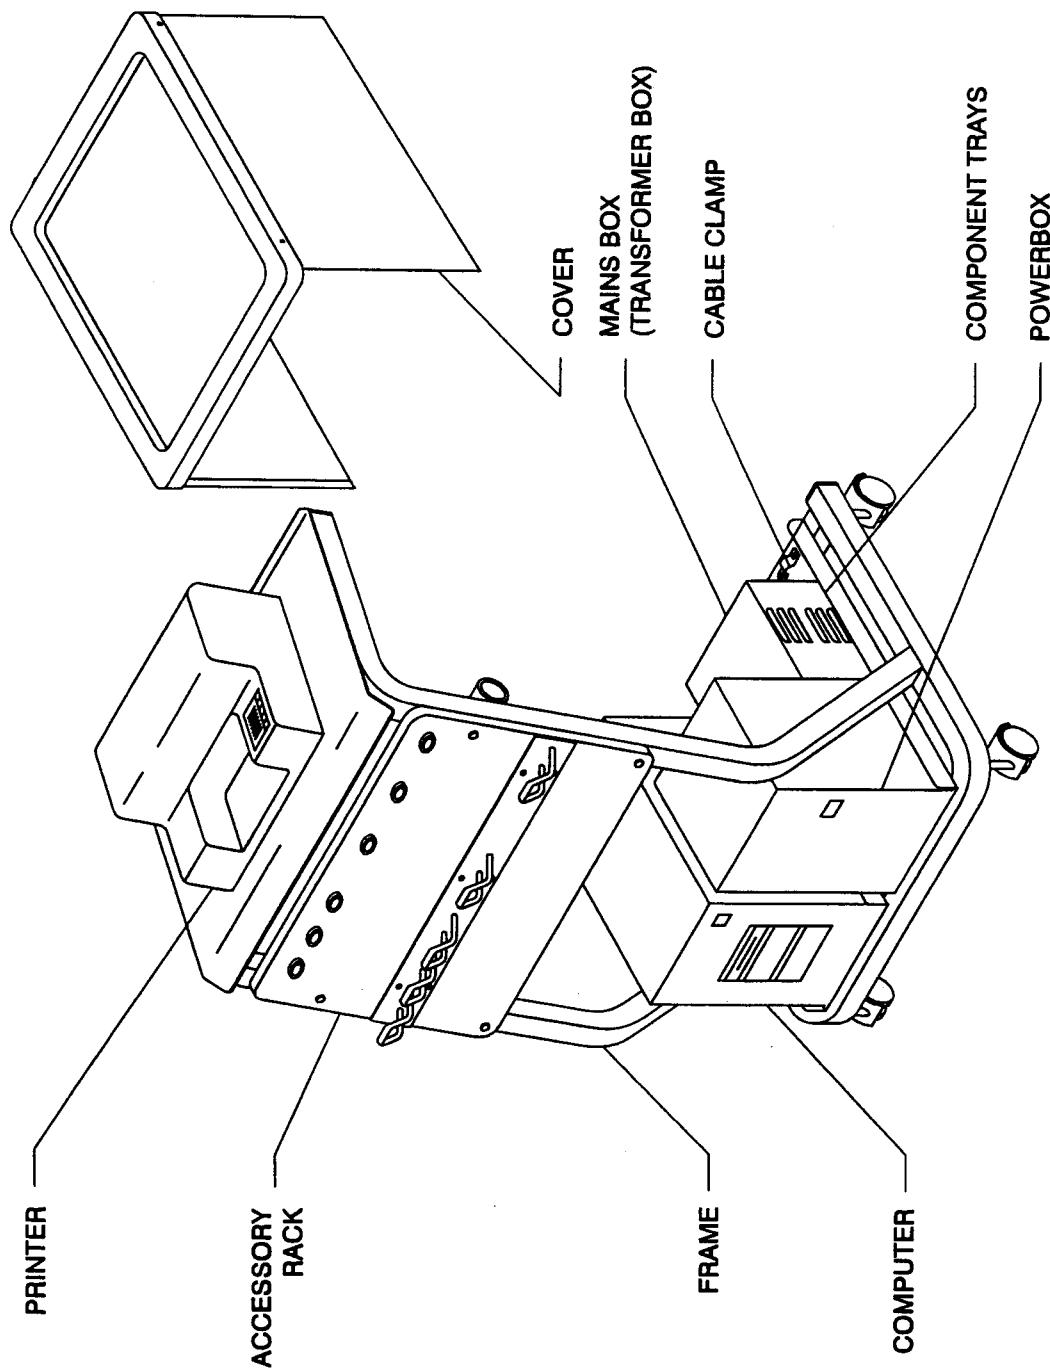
Assembly of the KIN-COM Accessory Cart.
